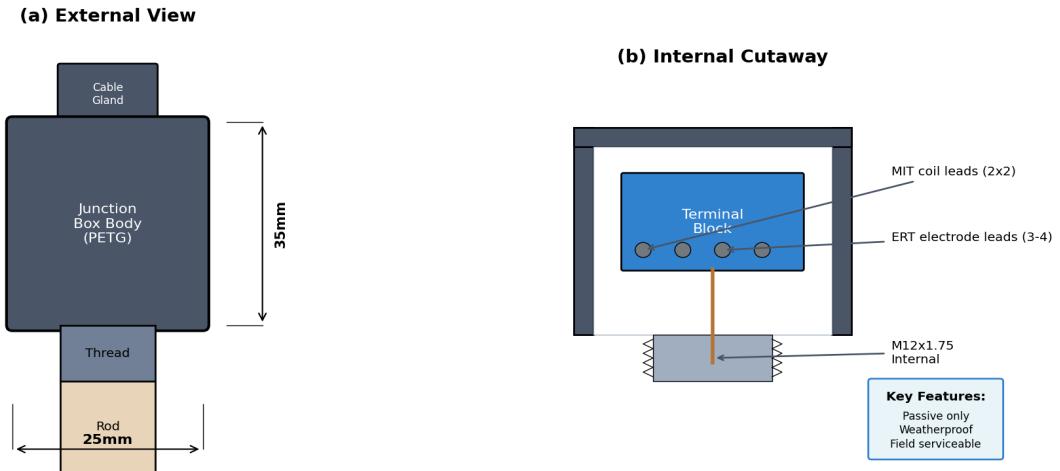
Junction box design showing (a) external view with cable gland and weatherproof body, and (b) internal cutaway revealing terminal block for MIT coil and ERT electrode connections. M12x1.75 internal thread mates with probe rod.
